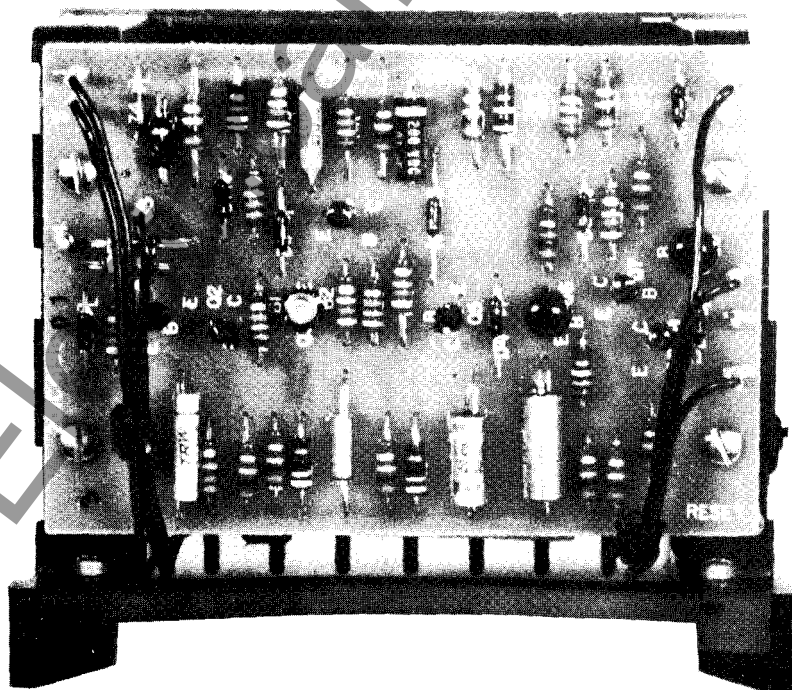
Type SGR-51 Reclosing Relay (Rear View)
